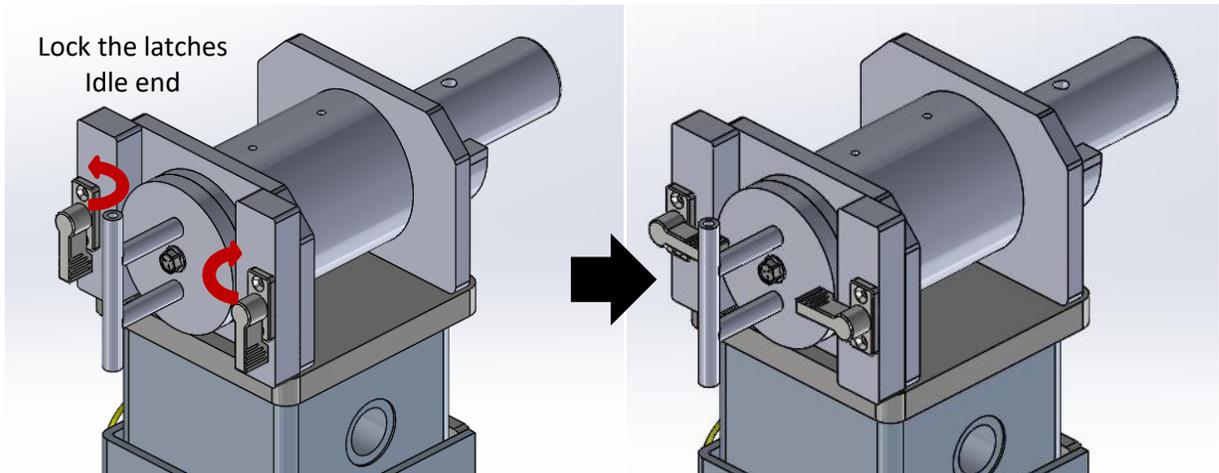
Operating Procedure for Welding Fixture Changeover, Lock Safety Latches, Idle End
